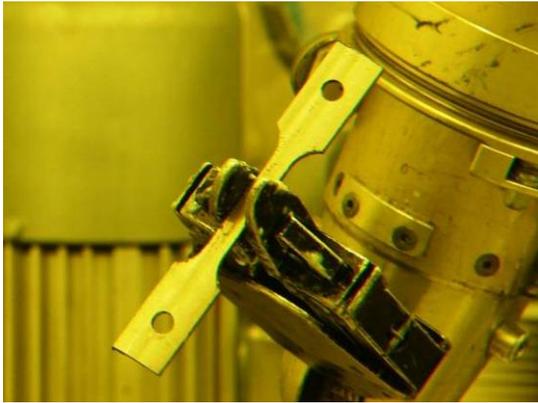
Tensile specimen is obtained by machining in CAD-CNC mill.
